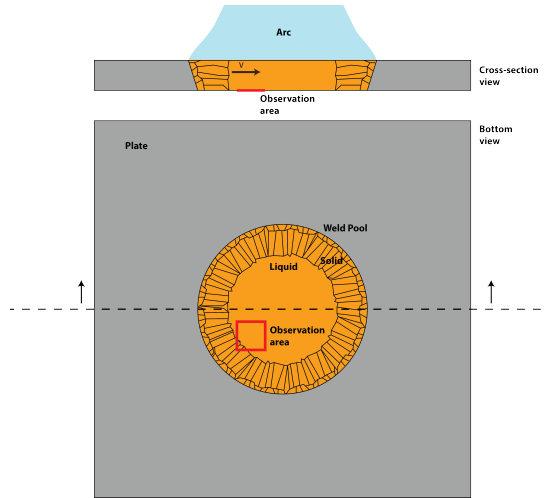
Geometrical description of the observed system, at the top a cross-section view and at the bottom a bottom view.
